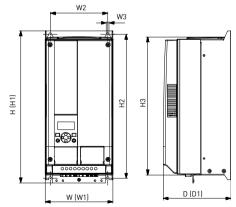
Dimensions Vacon 20, MI4 - MI5
